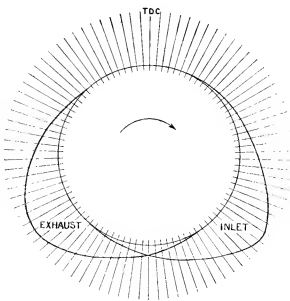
The cam profiles which give the valve timing as shown in Fig. 5
